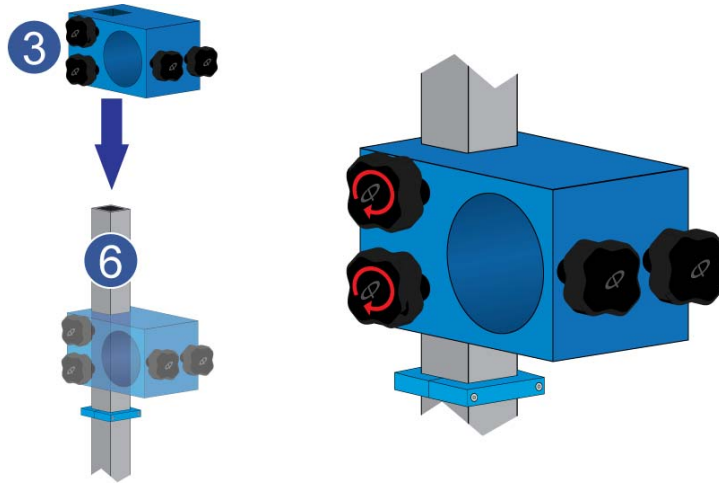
Assembly Instructions - Coil Mounting Structure - Step #1
